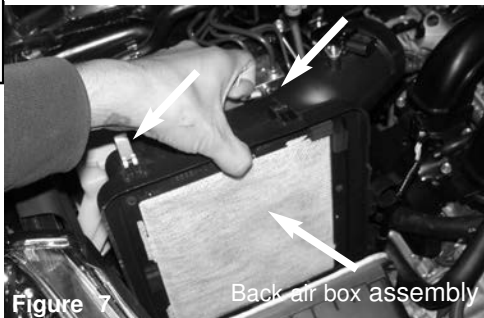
Unclip the metal retaining clips on top of the back air box assembly. Lift up and remove it from the engine bay
